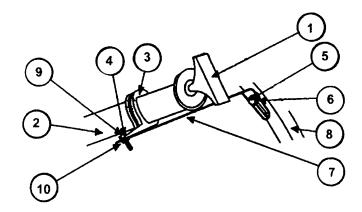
Oil Fill Tube Assembly and Oil Level Indicator (Dipstick).
